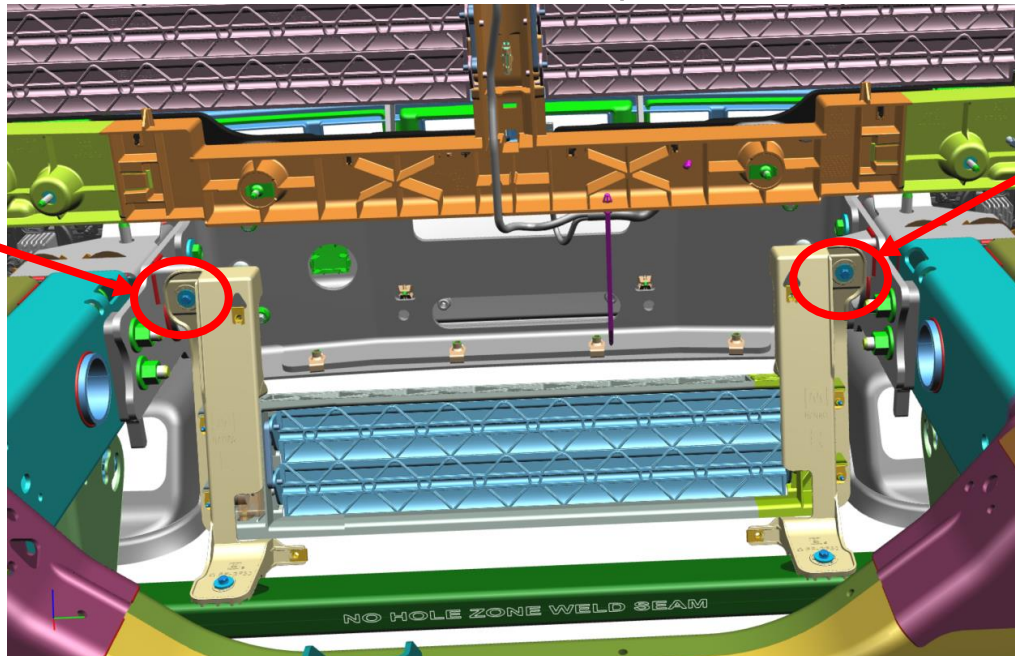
Backside AEV GMC Front Bumper and Shutter-Baffle
